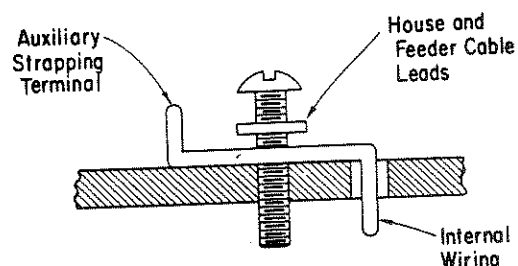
Section of Terminal Strip from 507-type PBX with Die-Cast Aluminum Chassis
